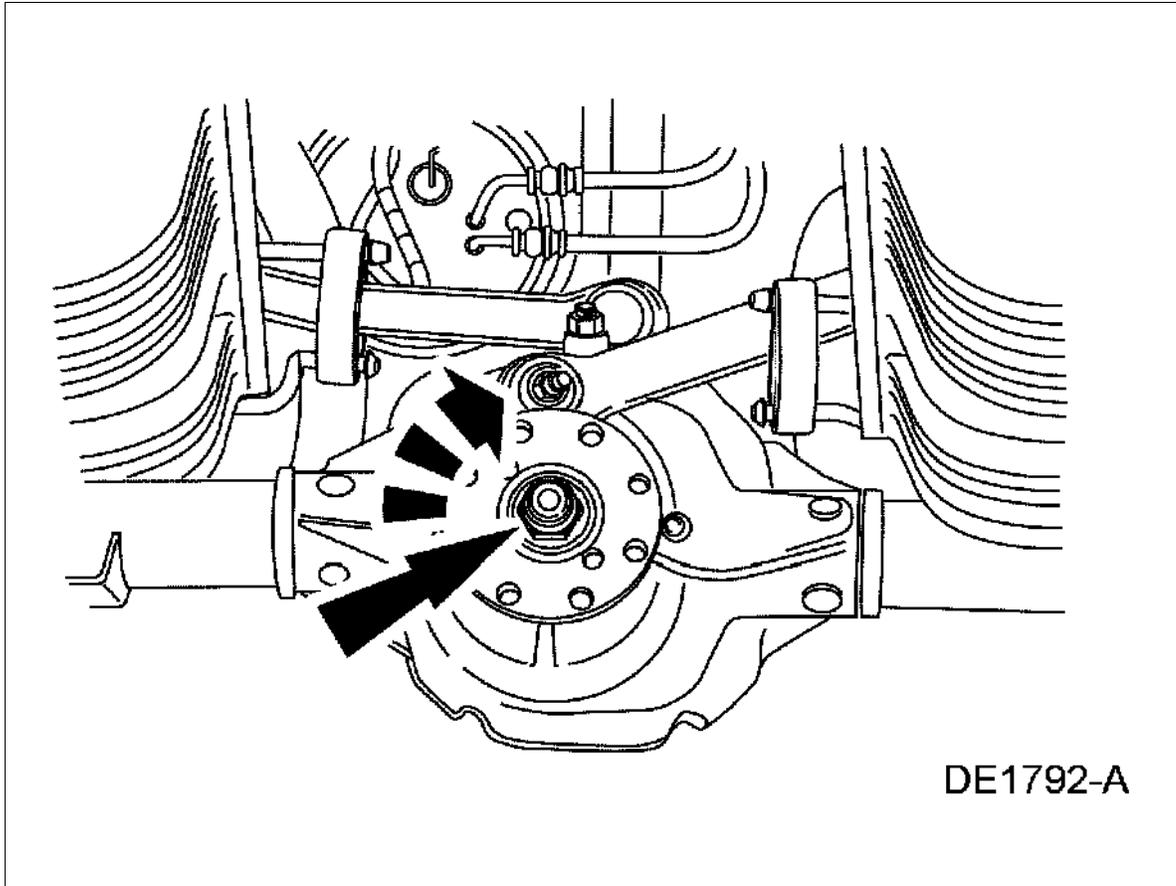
Disconnecting Driveshaft Flange Yoke From Pinion Flange
